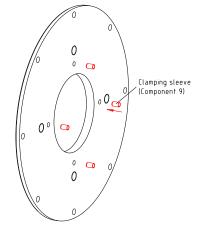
Assembly of clamping sleeves (component 9) (Type DFH)
